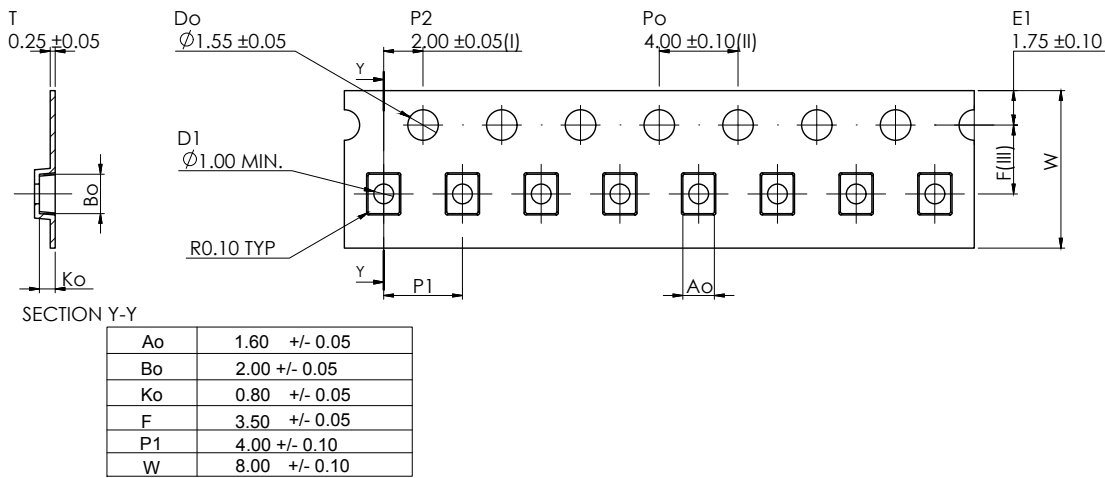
Drawing of tape (first-angle projection) with tape dimensions
